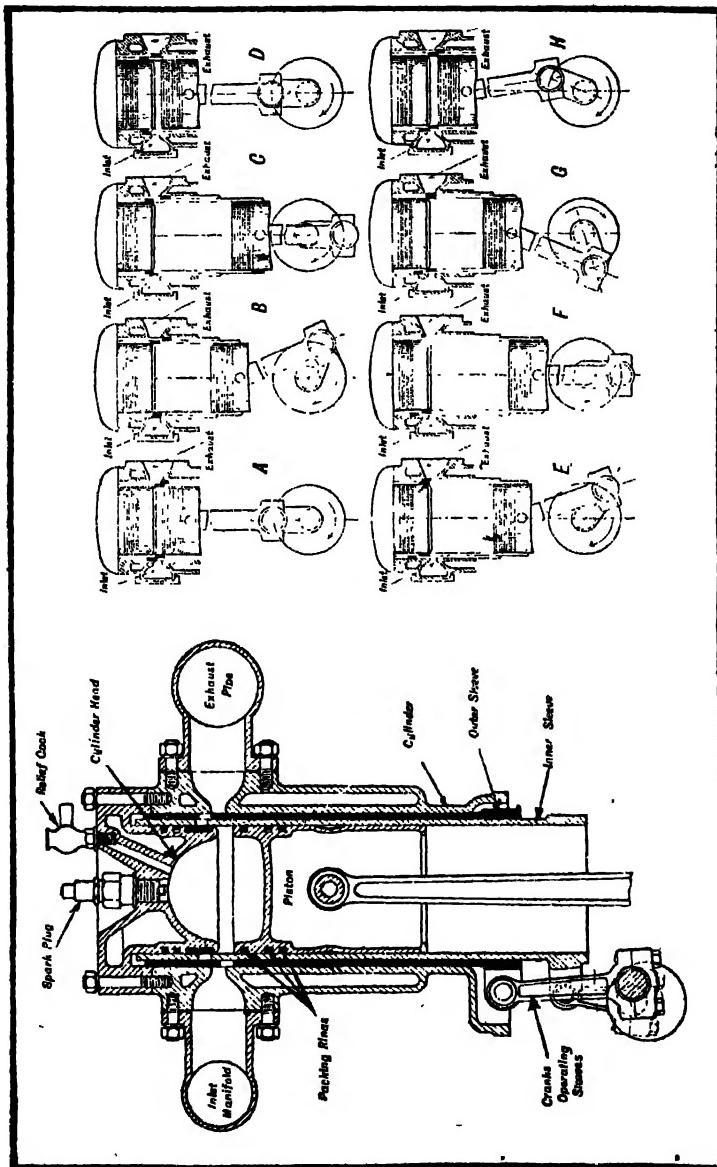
Operation of Knight Slide Valve Motor Showing Action of Sleeves for Opening and Closing Cylinder Ports.
